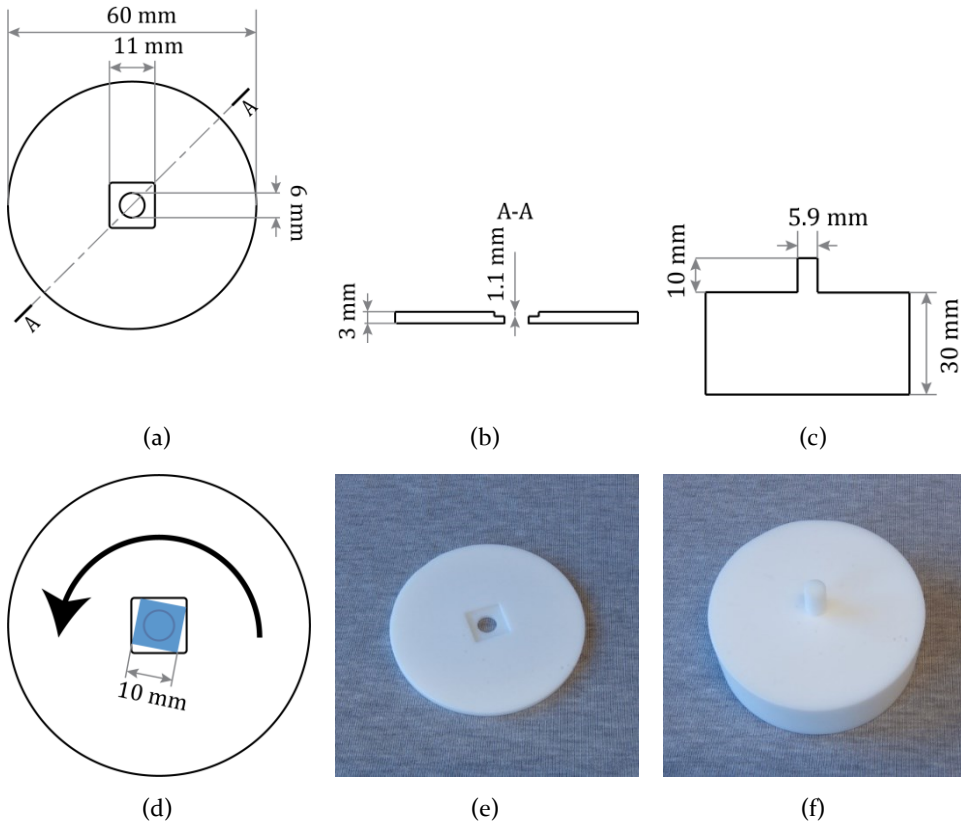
Technical drawing of the chuck used for edge bead-reduced spin coating. (a) Top view of the chuck. (b) Cross-section through line A-A in (a), showing the thickness of the chuck and depth of the recess. (c) Cross-section of the base plate. (d) Schematic of the chuck with the sample mounted, with the direction of rotation indicated. (e-f) Photographs of the spin coating chuck (e) and sample removal tool (f).
